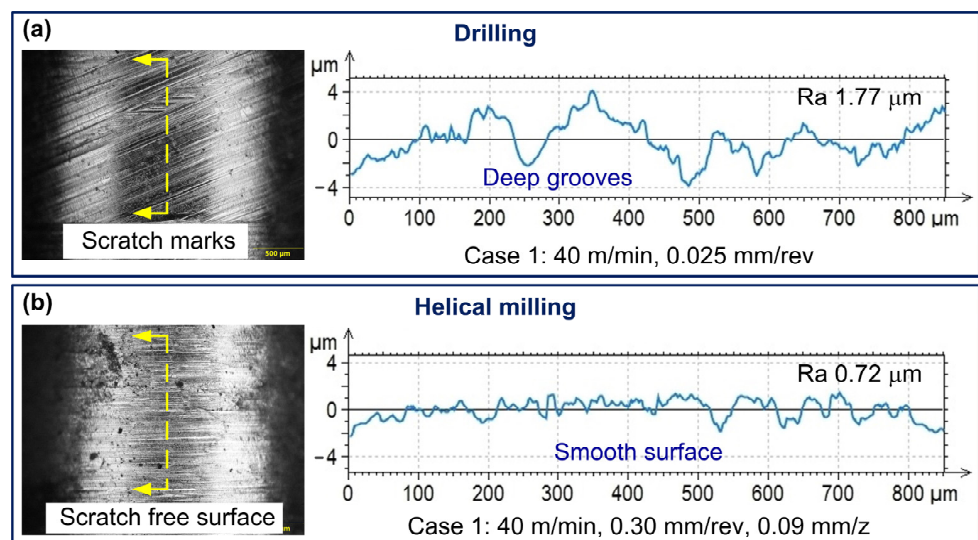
Machined surface and 2D profile of the borehole produced with (a) drilling and (b) helical milling.
